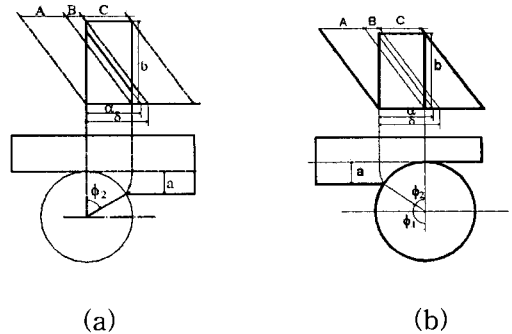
Contact length of cutting edge at cutting position (a)Up endmilling, (b)Down endmilling
